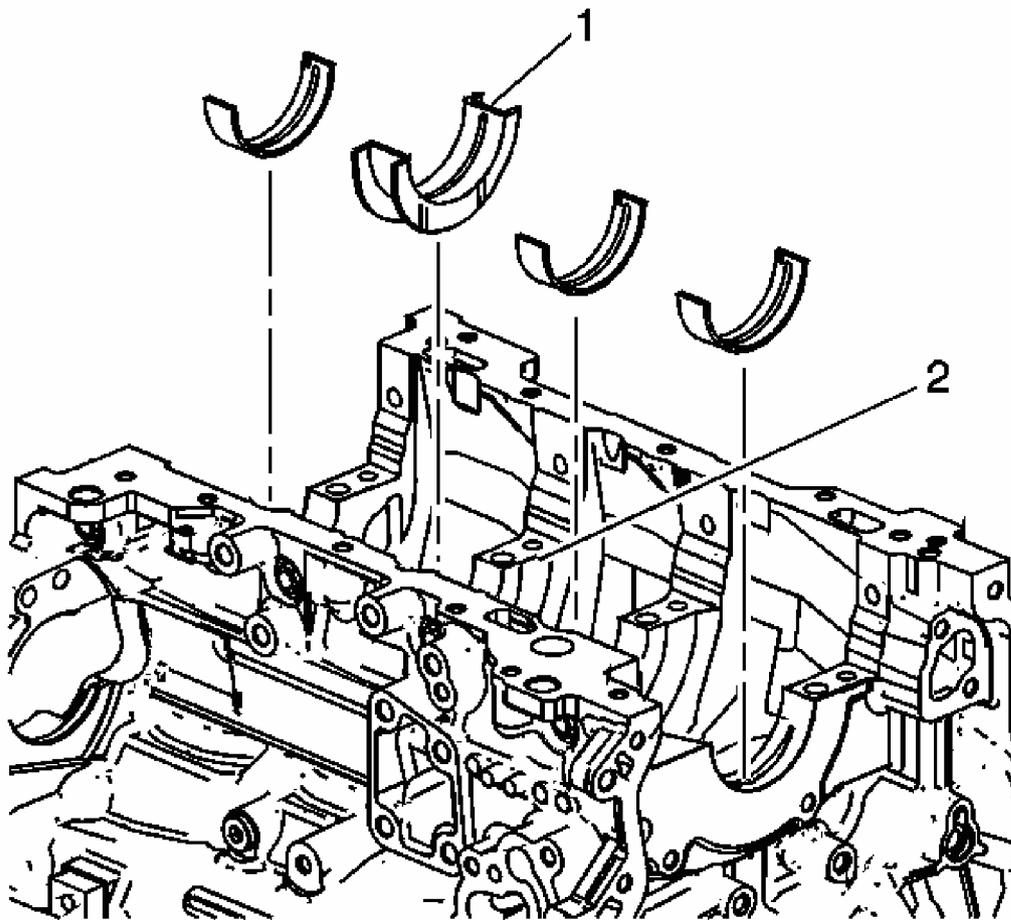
Locating Thrust Bearing In Number 3 Journal
